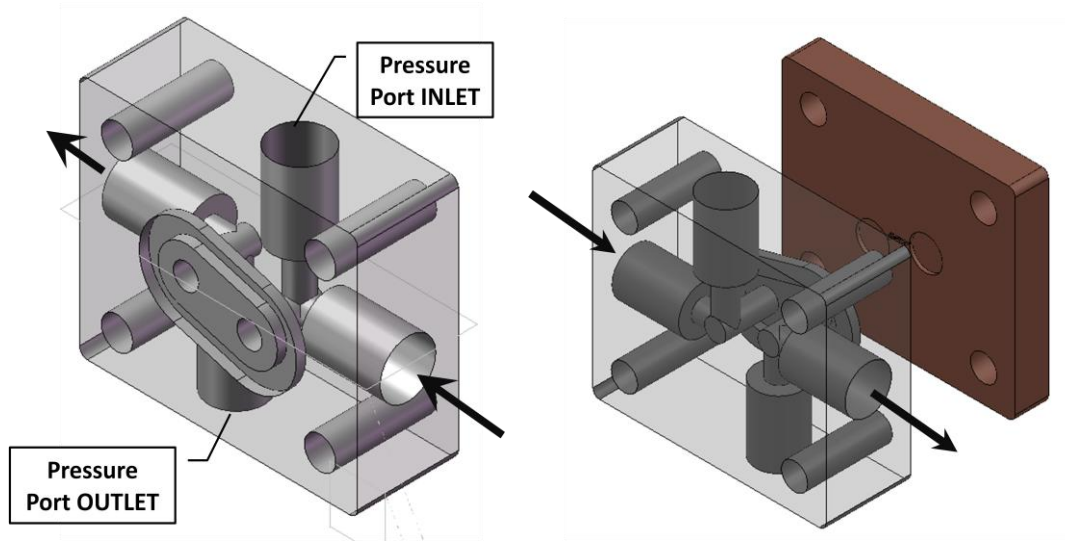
Cover Design (LEFT); Exploded View (RIGHT)
